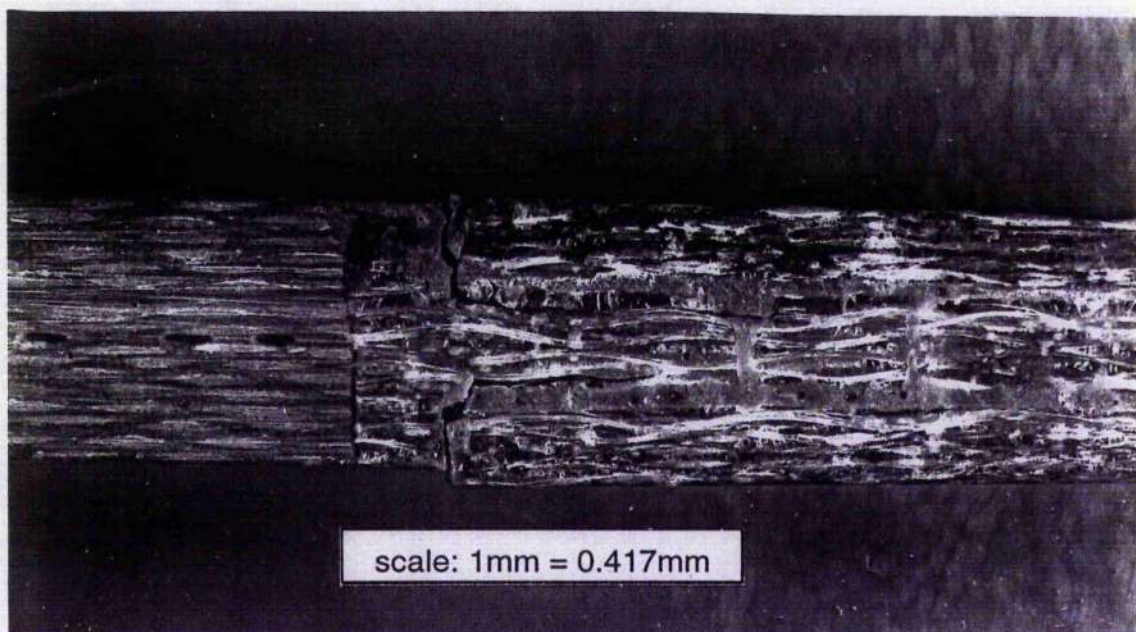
Recessed strap joint tested in tension demonstrating an adhesive failure
